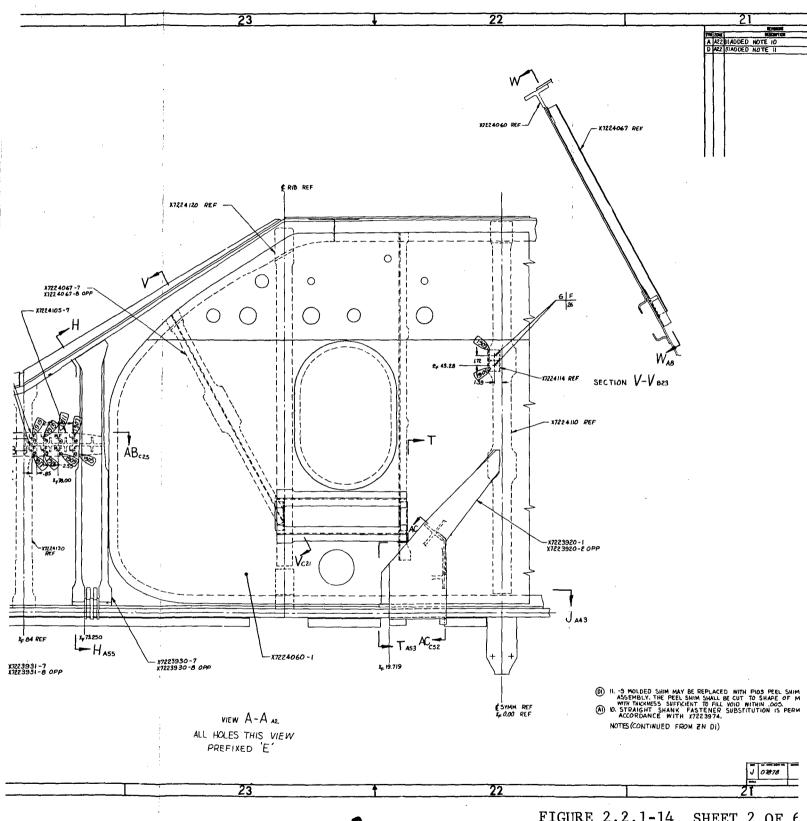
, SHEET 2 OF 6 FASTENER HOLE IDENTIFICATION - WCTS A
